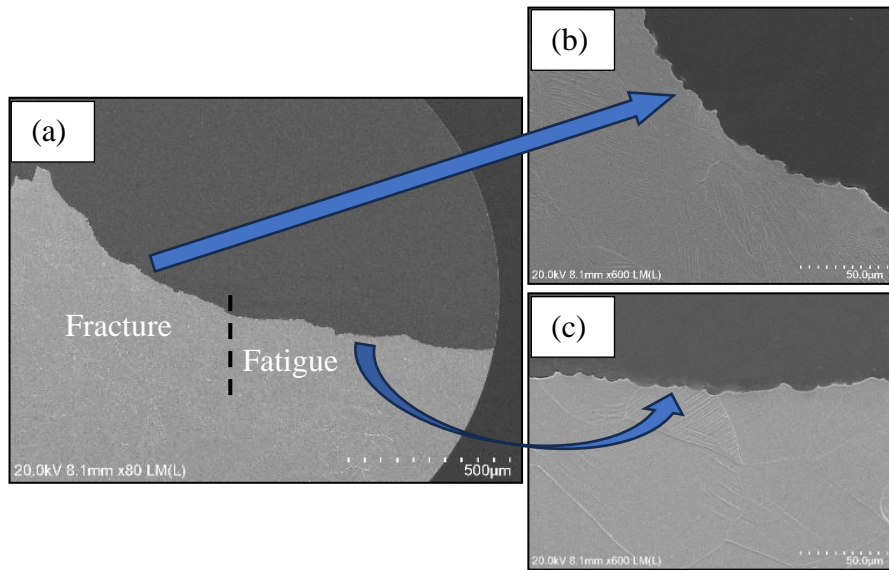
SEM image shows (a) the complete crack path, (b) the crack path in fracture and (c) the crack path in fatigue of specimen FT-4.
